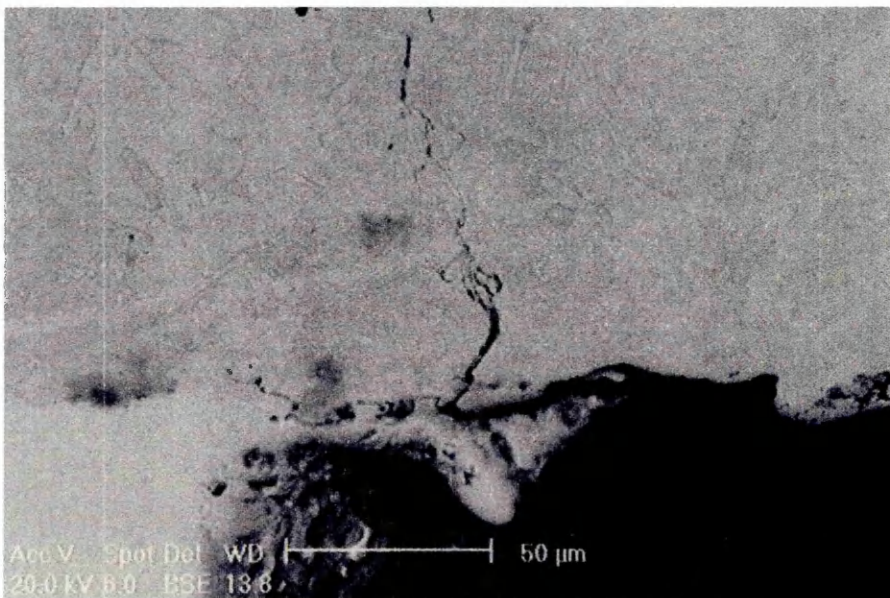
Back scattered electron image showing fatigue crack initiation in the 1.2mm V1437 from 1.2mm V1437 (top) – 1mm 2101 dissimilar metal lap joint
